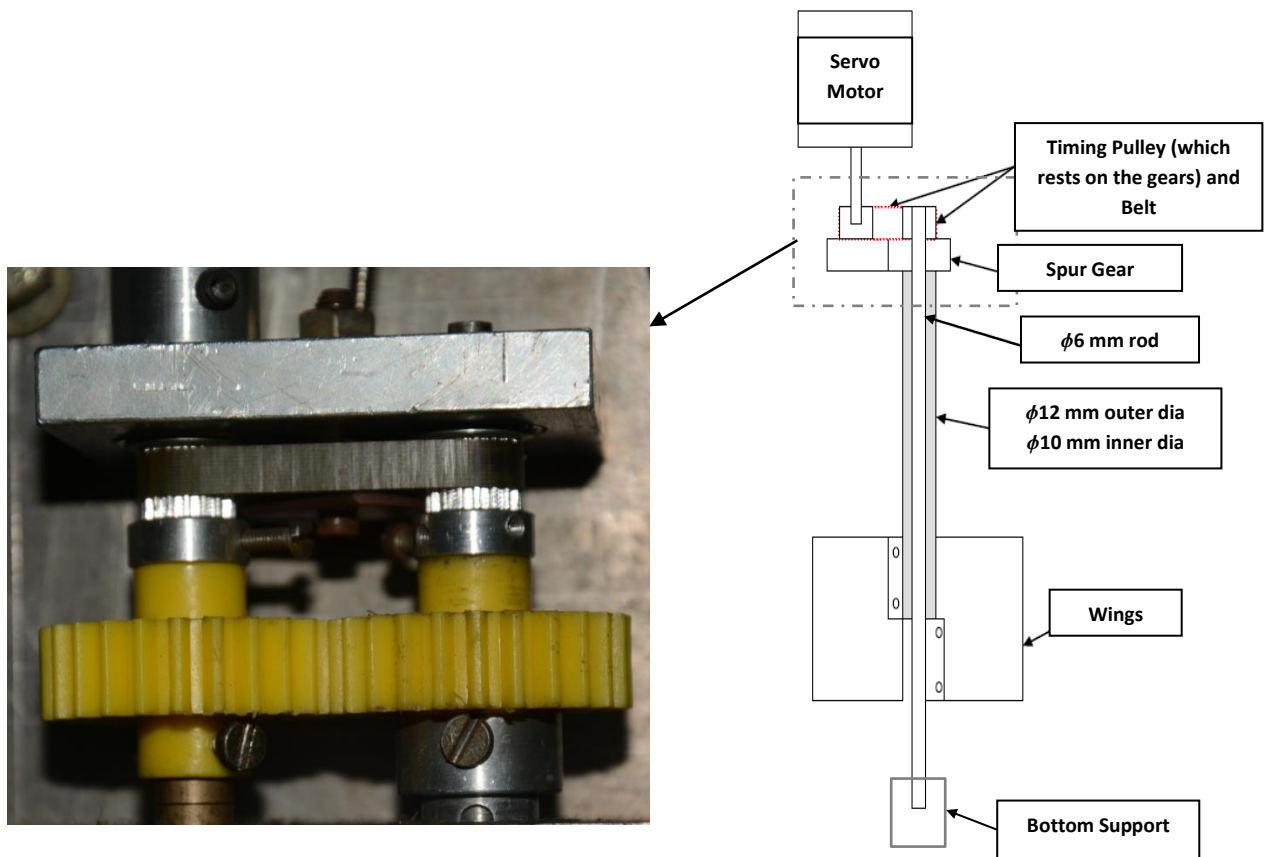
Schematic of flapping mechanism as well as photo of the drive assembly with timing pulley and spur gears.
